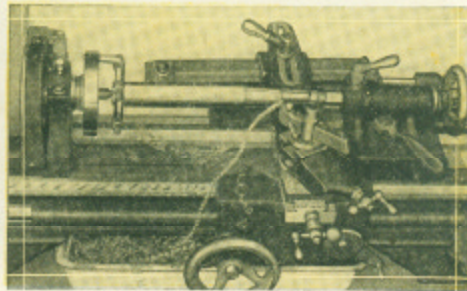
Using the Taper Attachment to Turn a Long Taper.
